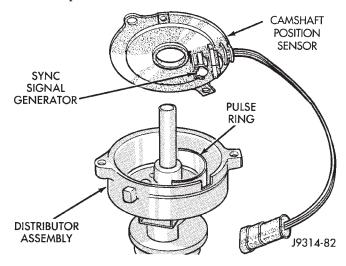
Camshaft Position Sensor—Typical (5.2L Shown)
